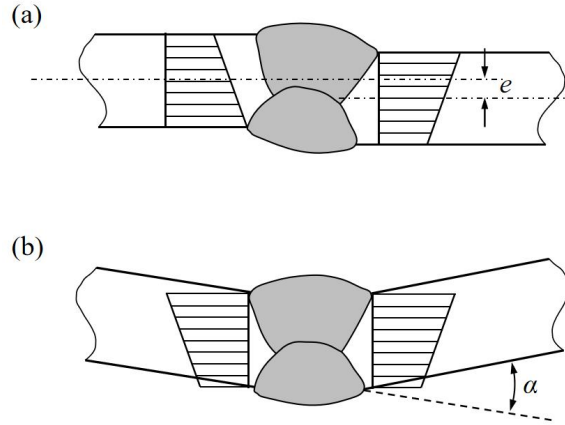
Misalignment in welded joint. (a) Axial; (b) Angular.
